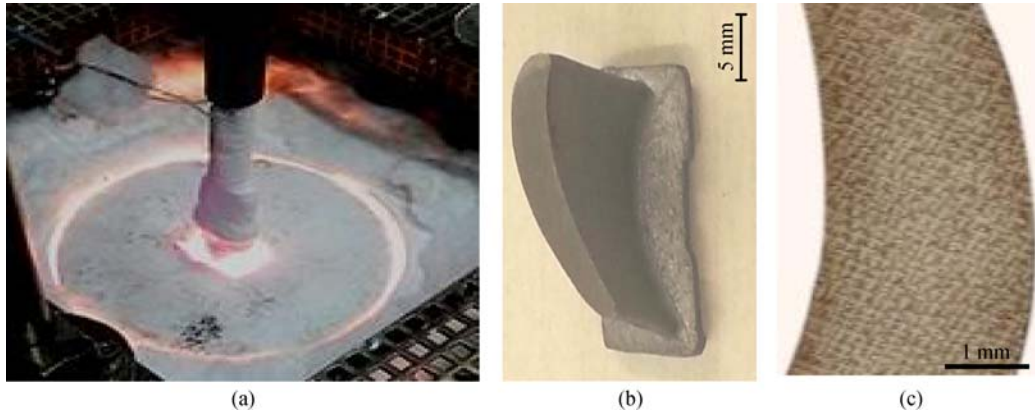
(a) D&H experiment with a thin-shell mold to manufacture SC blade of superalloy CMSX-4; (b) as-cast blade; (c) transverse section
